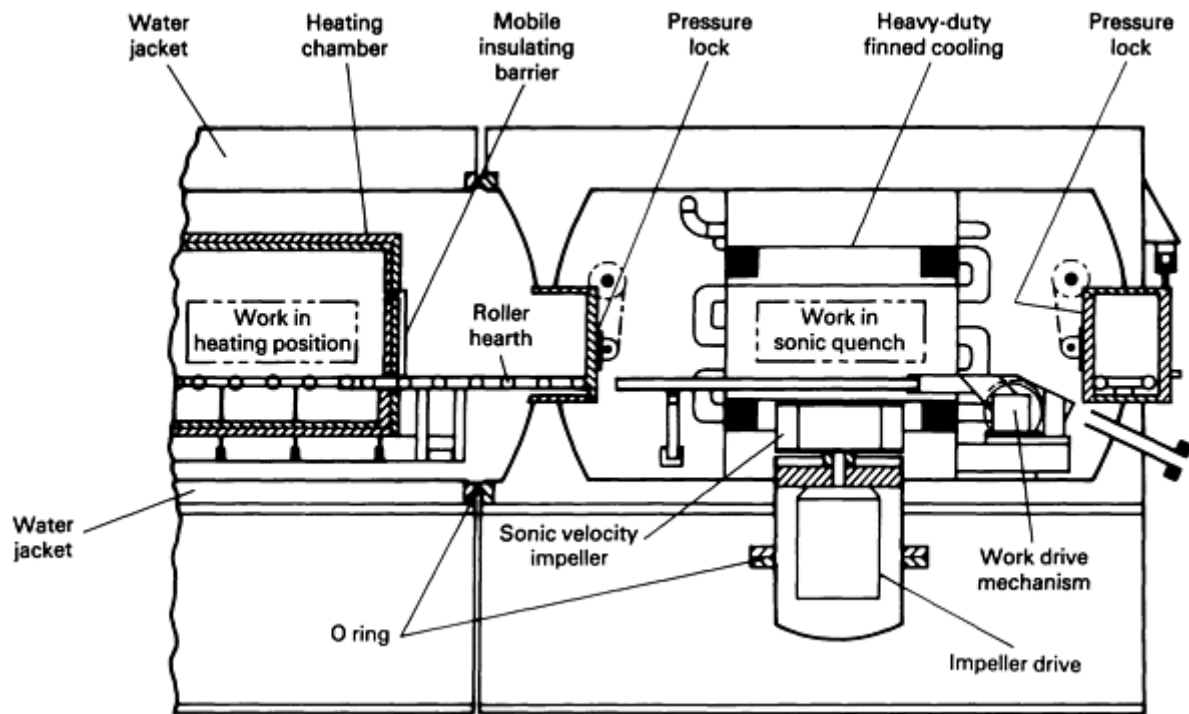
Pressure-quench module for attachment into standard vacuum-sealed quenched and continuous vacuum furnaces. Source: Ref 90
